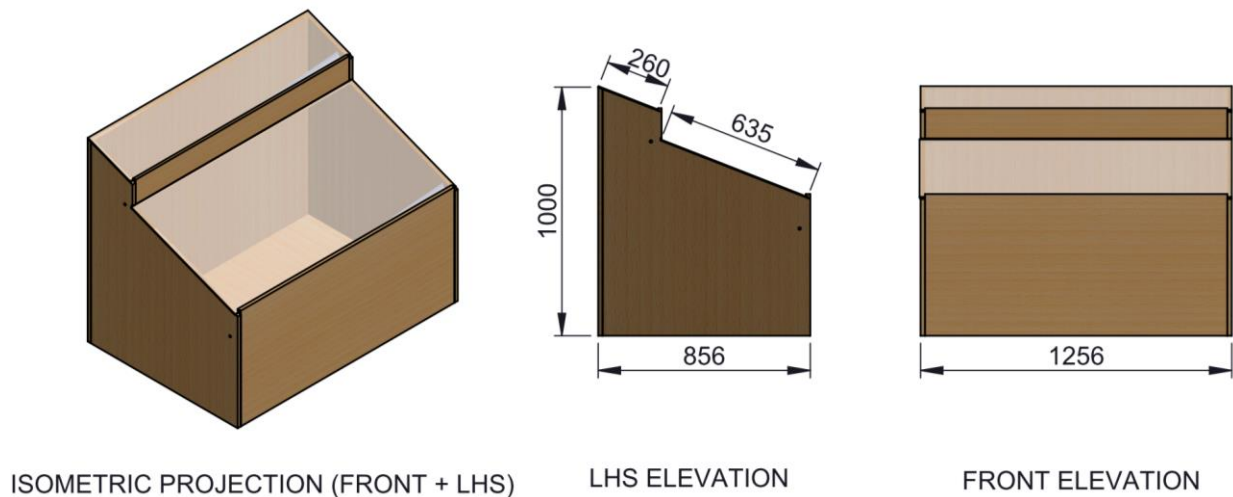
Projection and elevations of rig assembly without insulation including major dimensions (mm).
